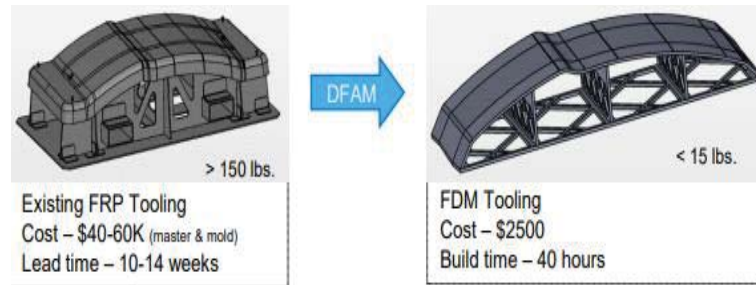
Economic case study of a traditionally manufactured composite tooling mold (left) and an additively manufactured composite tooling mold (right) [28]
